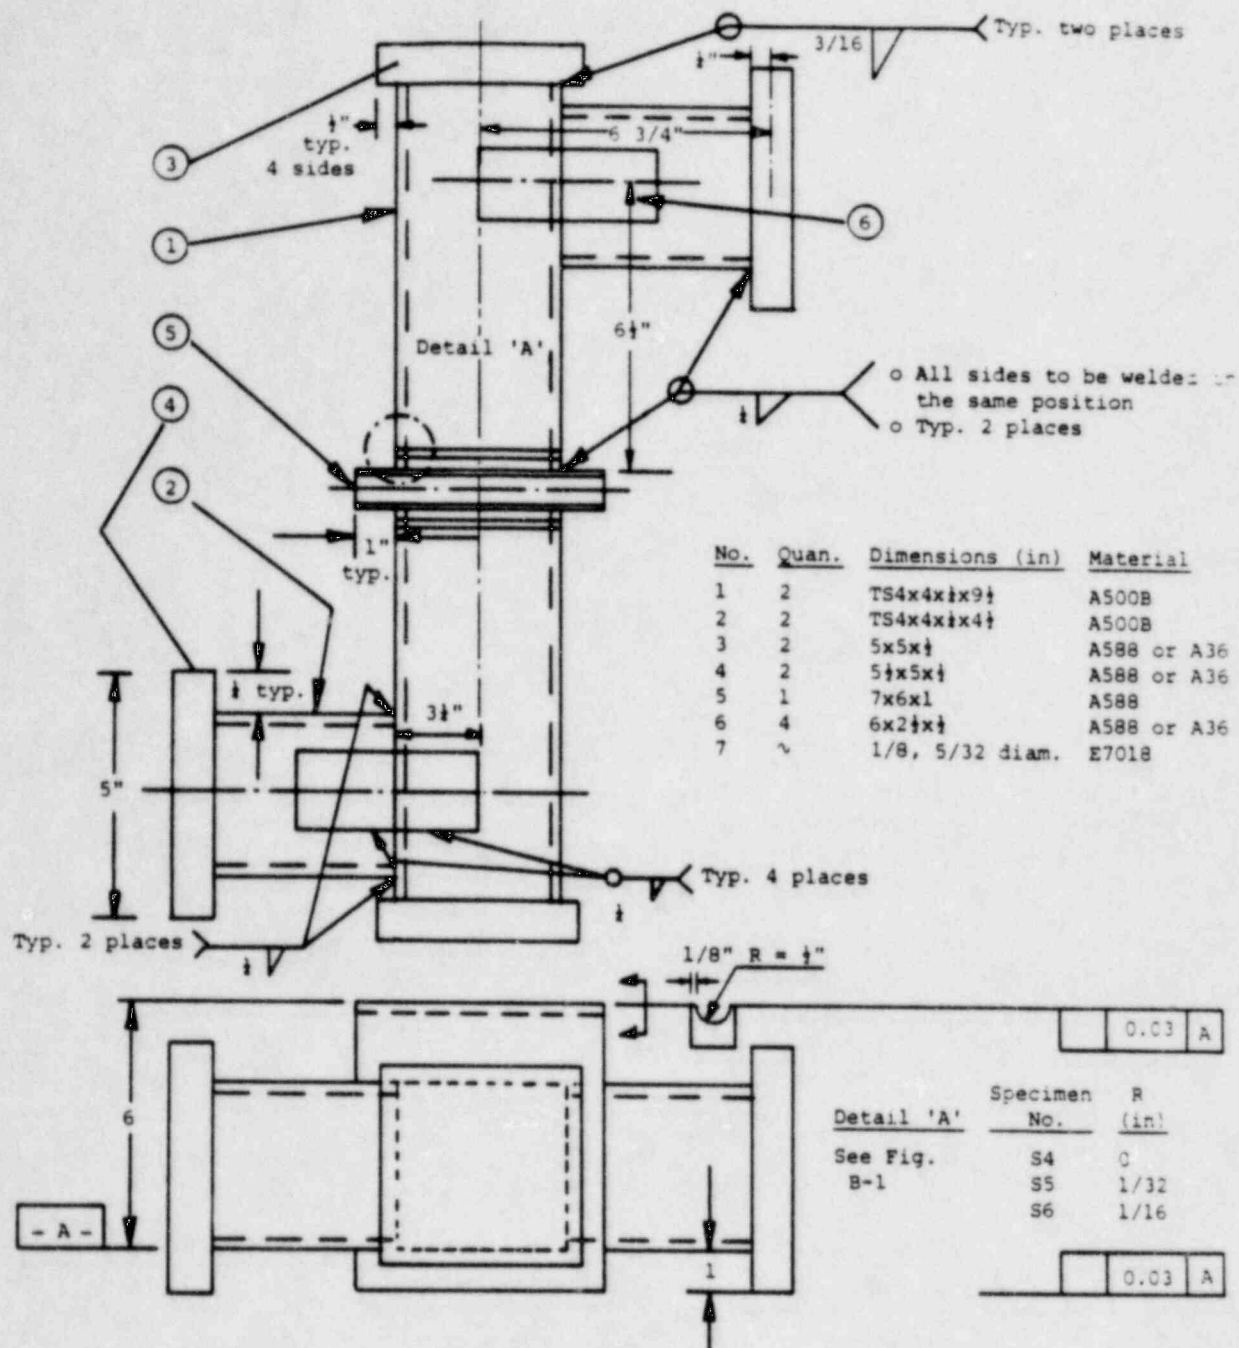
Details of Eccentric Specimens (54, 55, and 56)
